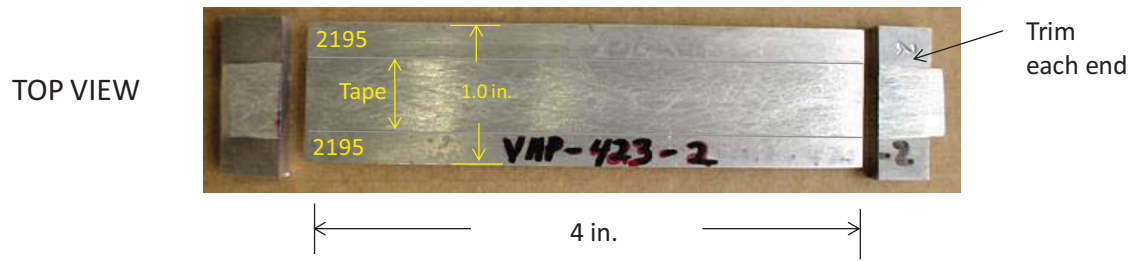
Top view photograph of three-point bend specimen machined from selectively-reinforced Al-2195 panel.
